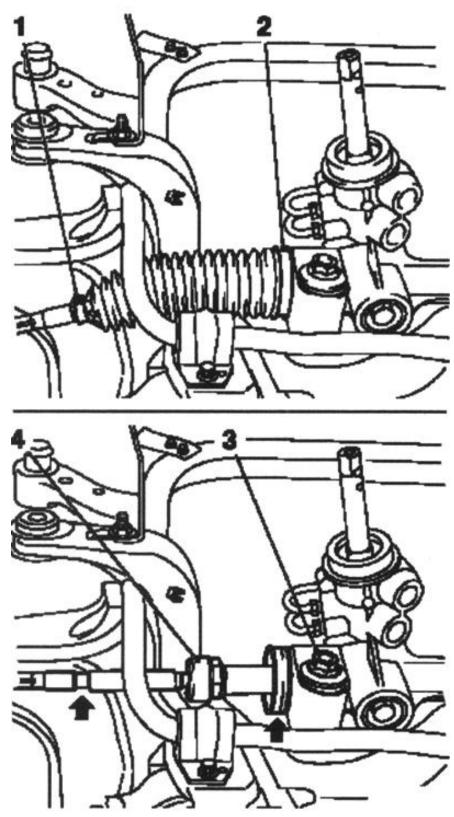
Withdrawal steering rods: 1,2 - Fixing brackets, 3 - nut, 4 - tie rod ends
